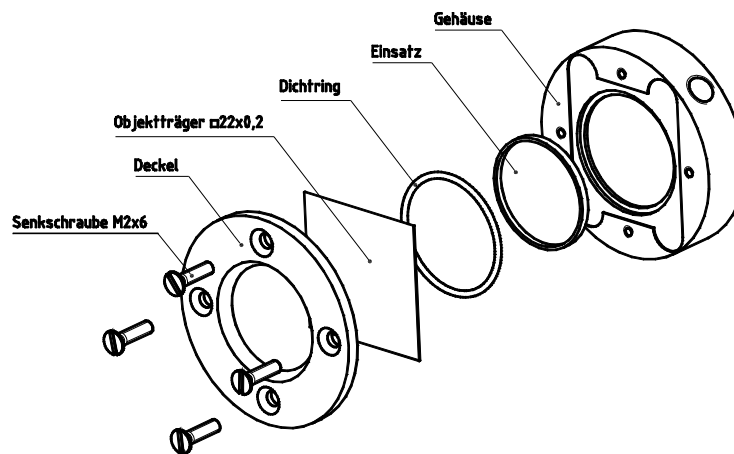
Mechanical drawing of the “Einfrierküvette”.
